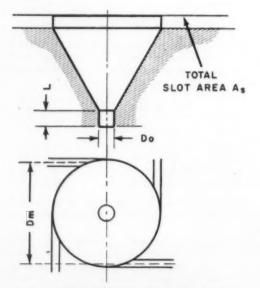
Sketch illustrating the dimensions of a swirl nozzle
